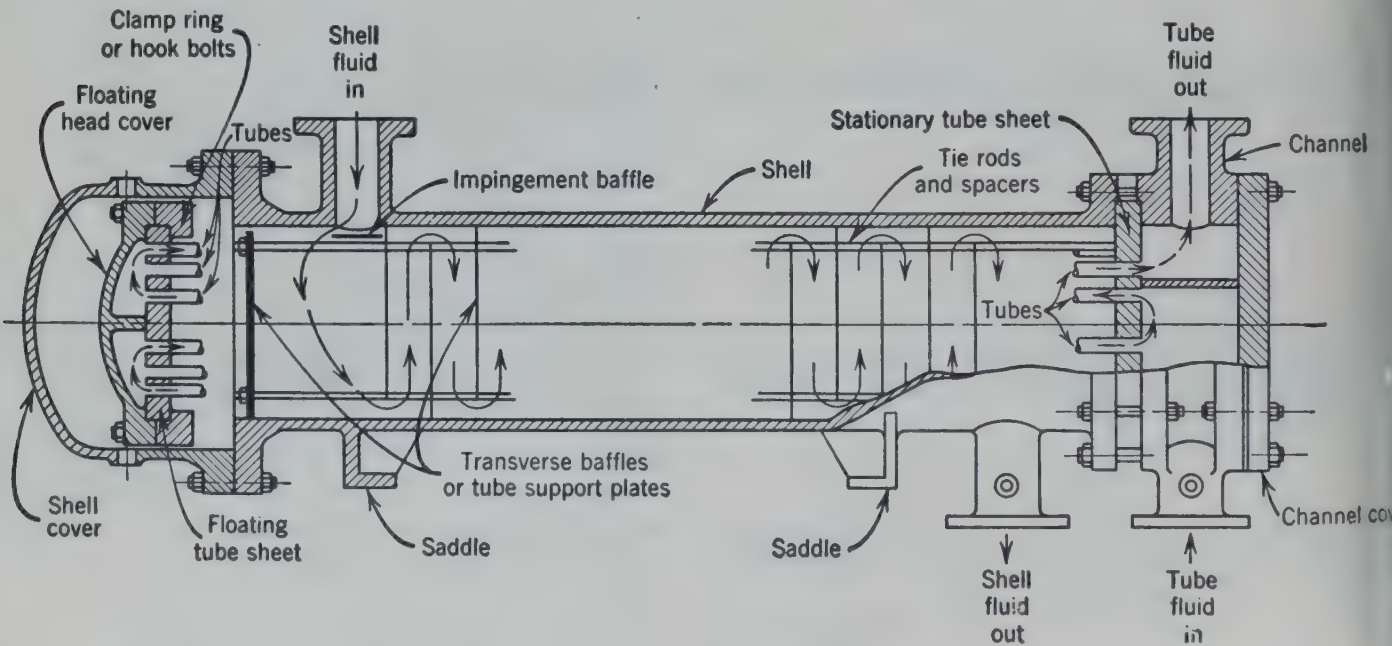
Cross-sectional drawing of a typical four-pass tube side, single-pass shell side, floating head heat exchanger. (Tubular Exchanger Manufacturers Association.)
